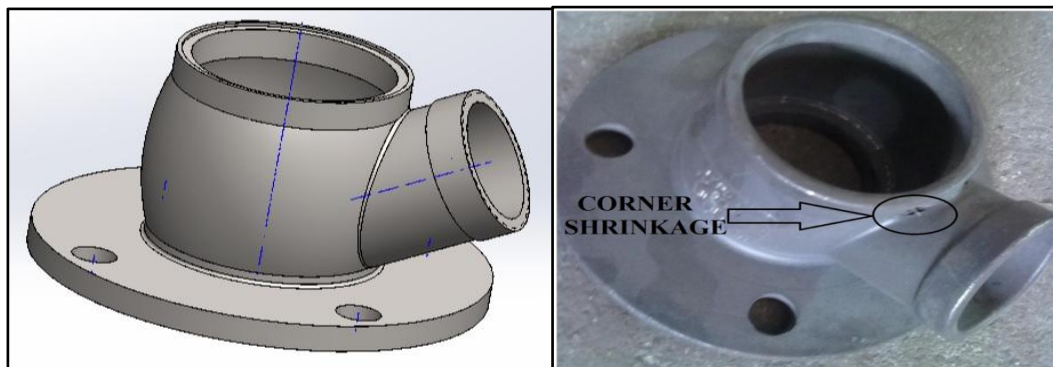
Single head hydrant valve body and with corner shrinkage defect
